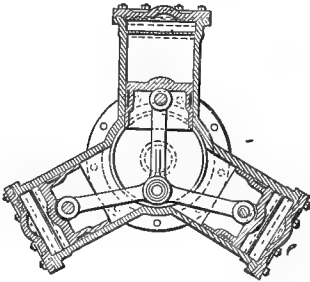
“Brotherhood” type of three-cylinder engine.
